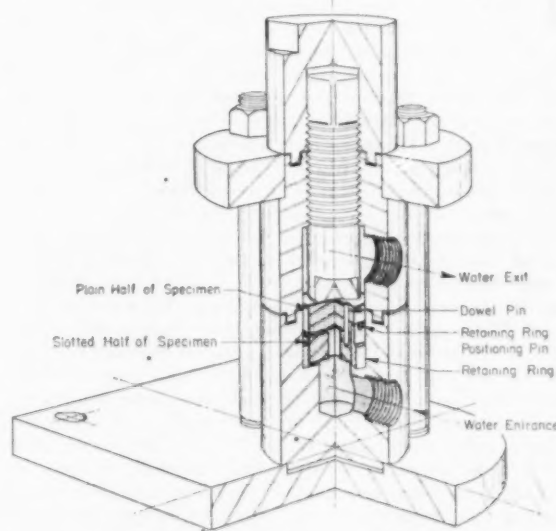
SECTIONAL VIEW, CORROSION-EROSION TESTER
